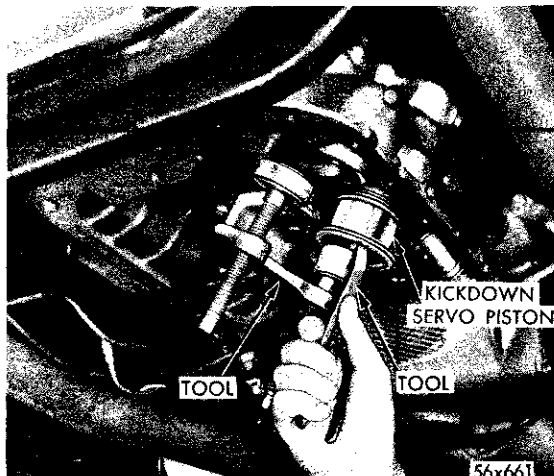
Removal and Installation of Kickdown Piston (Typical View)
